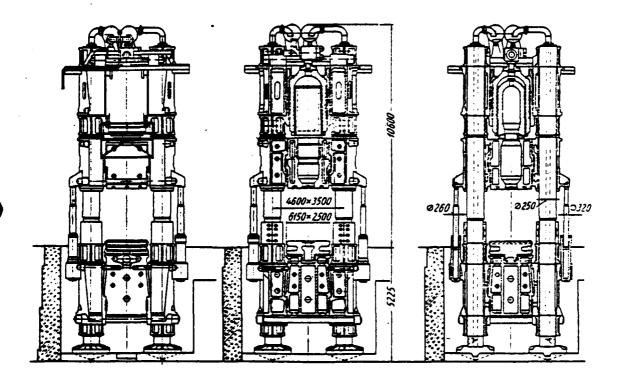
Three-cylinder hydraulic stamping machine by effort/force 15000 t. Side view and sections/cuts along the transverse axes.
